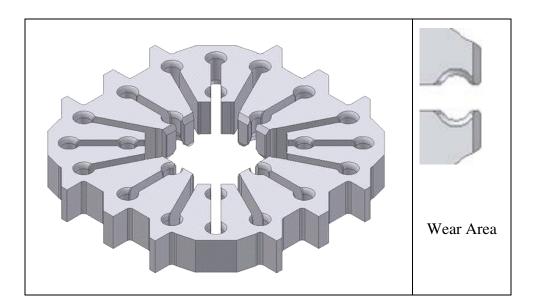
Typical Westinghouse control rod guide card (17x17 fuel assembly)
